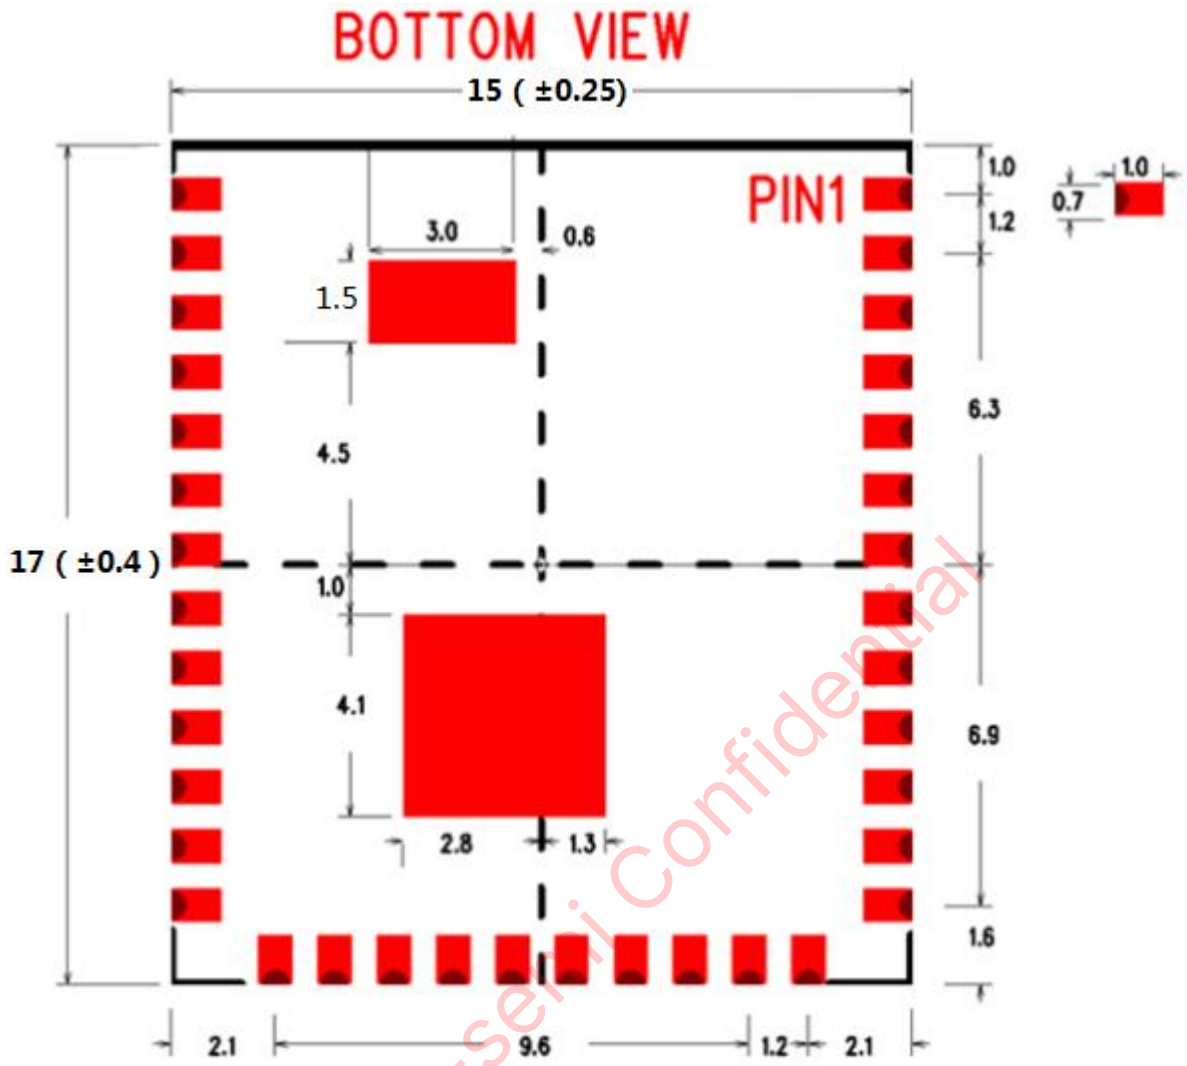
TX-AH-Rx00Pxx Module Bottom View
